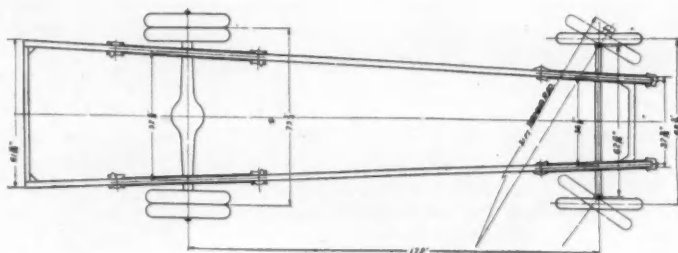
CHASSIS DIMENSIONS OF THE 29-PASSENGER SINGLE-DECK BUS
